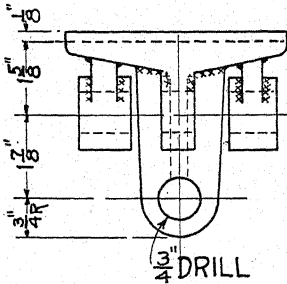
Roller chain links, arc welded, save \$22.44 per tractor.
